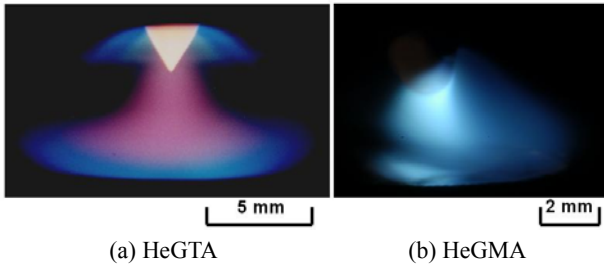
Photographs of GTA welding and GMA welding in helium at 150A in arc current.
